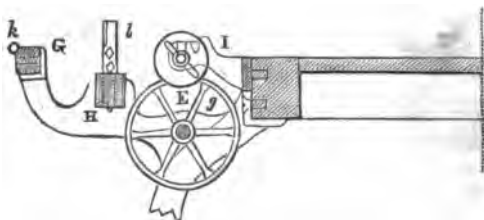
Bobbin Mechanism of the Silk Engine.
